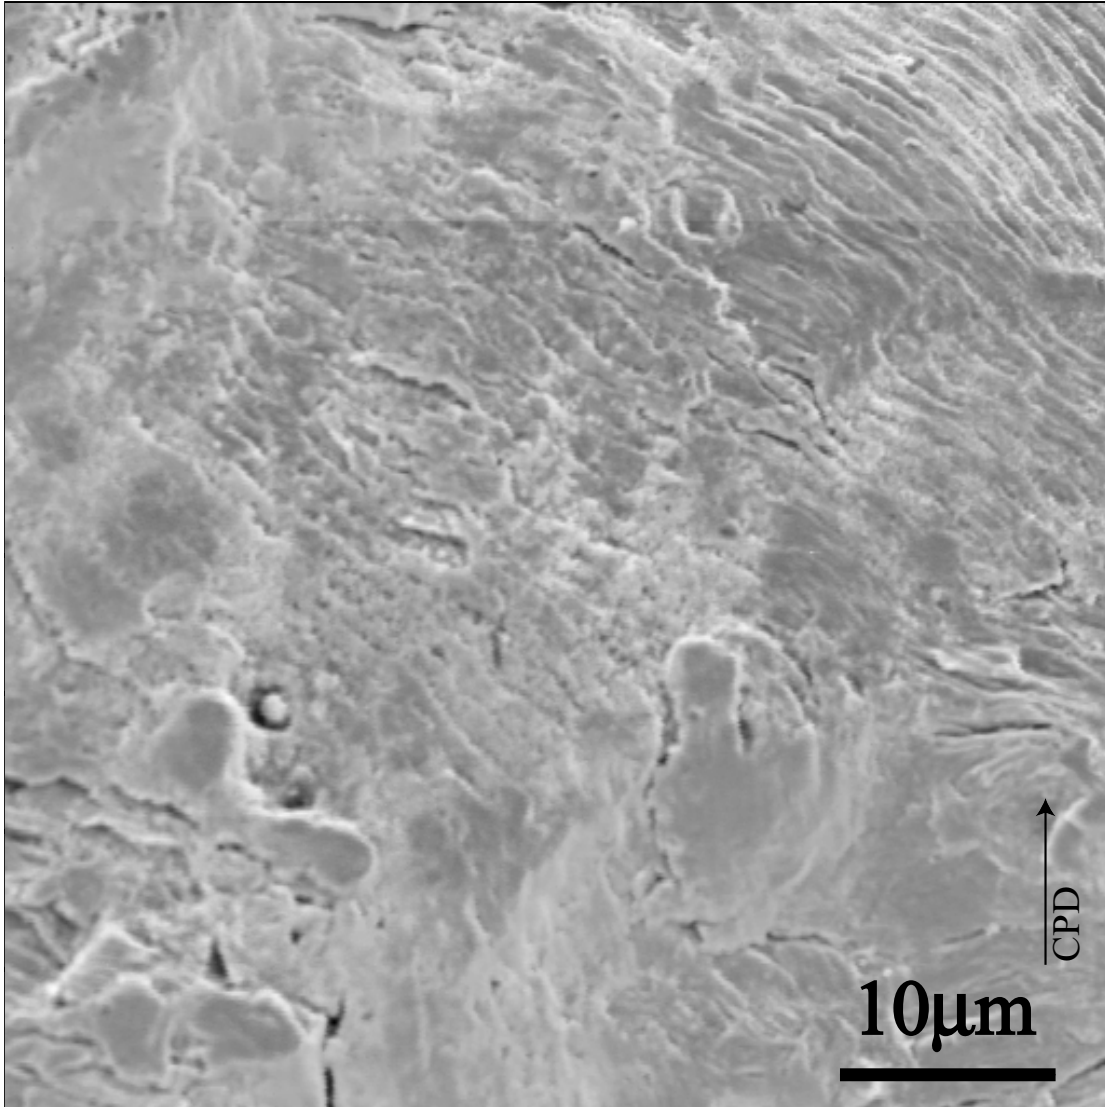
The SEM image of CrMo fatigue fracture surface: case2($\times 800$)
